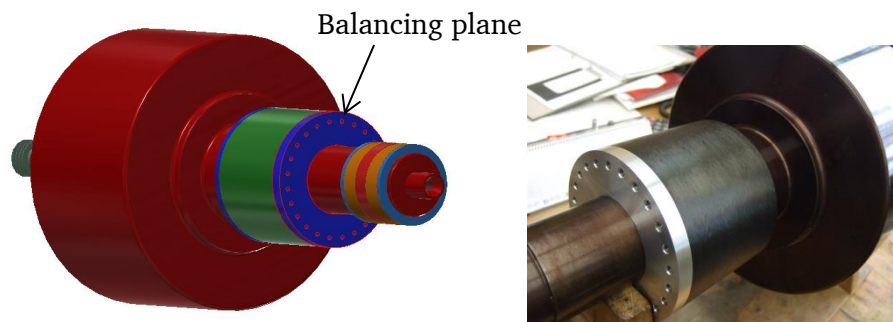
Rotor balancing screw holes on E-machine end plate (aluminum) in Fig. 5-1: a) 3D drawing [47], b) photo of the prototype
